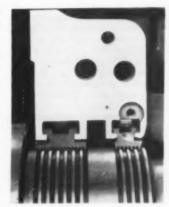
CLOSE-UP VIEW OF METALLIC PACKING.
